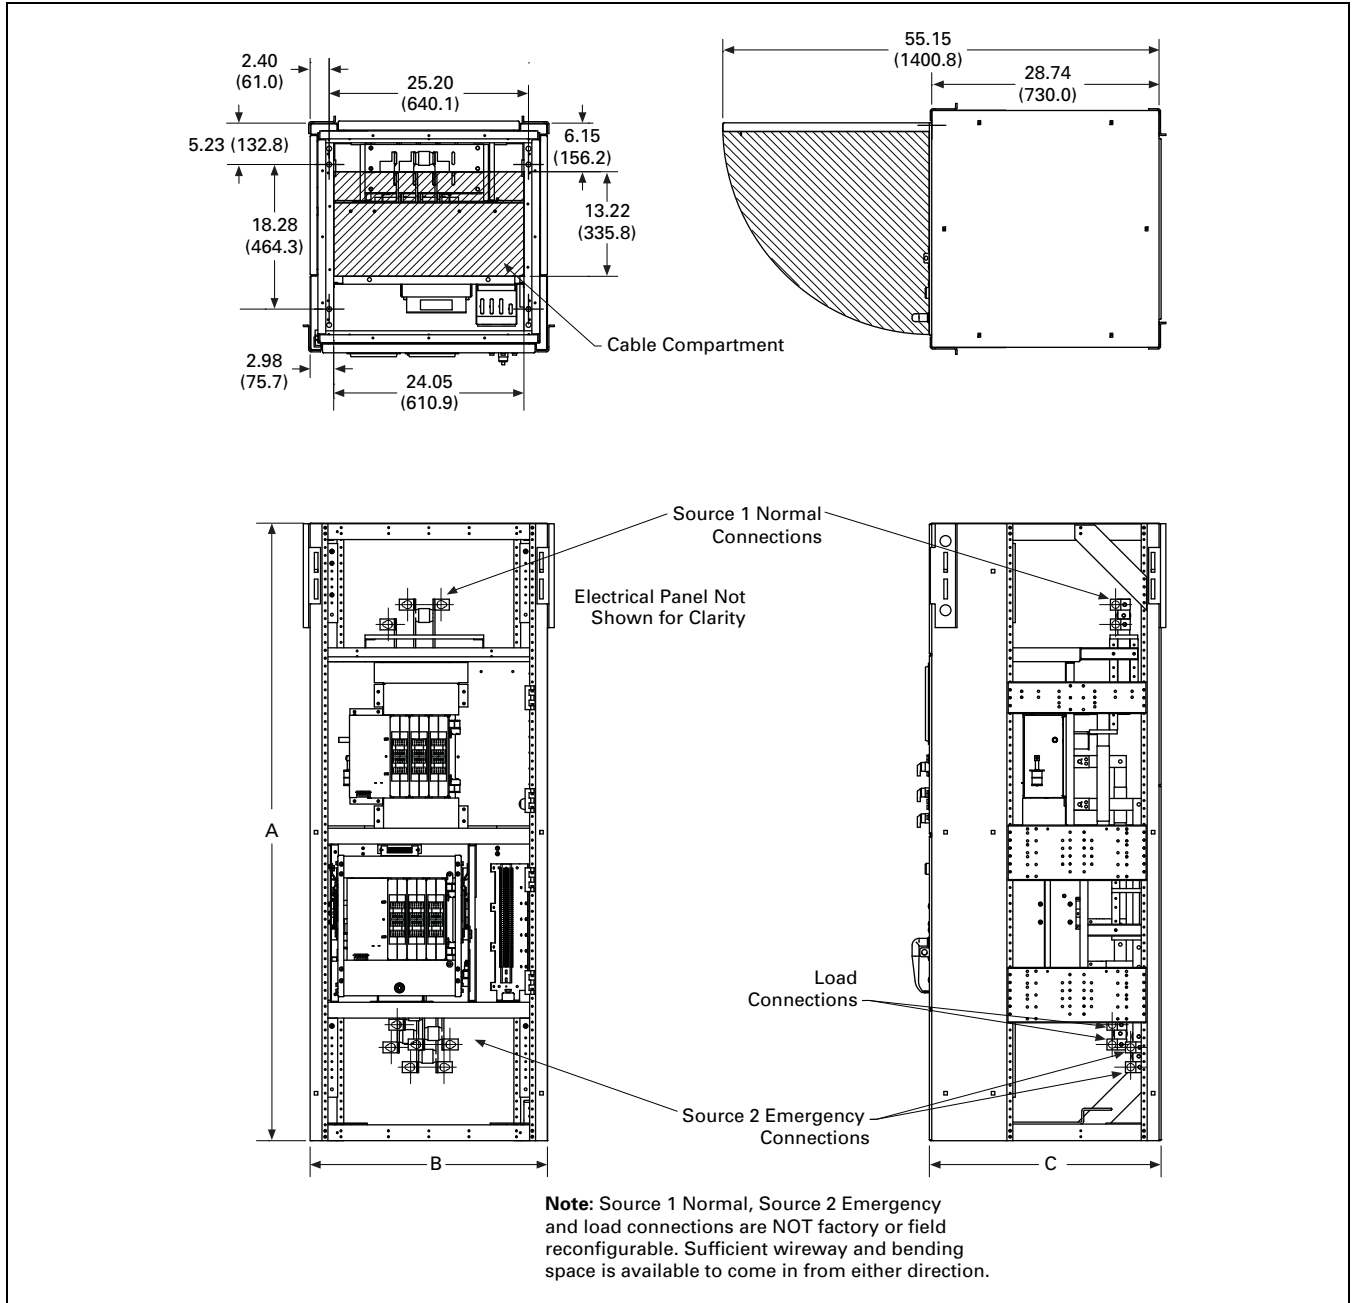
Bypass Isolation-Based Design NEMA 1 and NEMA 3R
